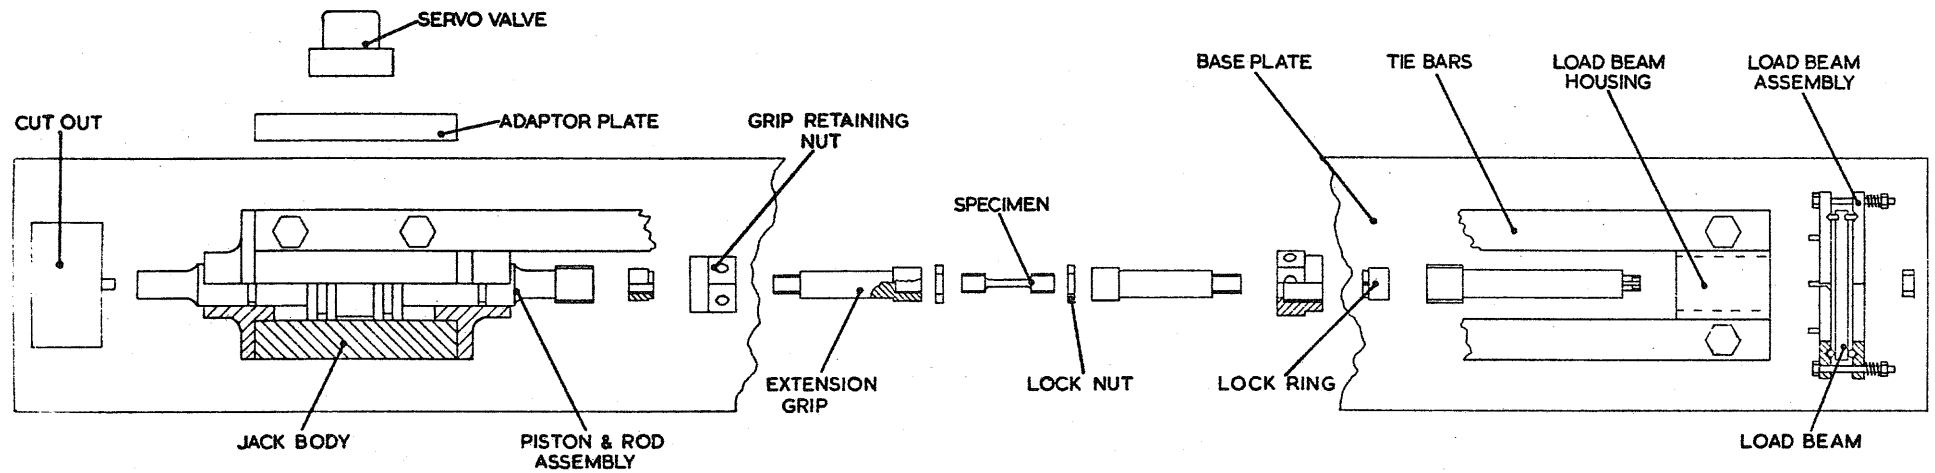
EXPLODED DRAWING OF MECHANICAL CONSTRUCTION
